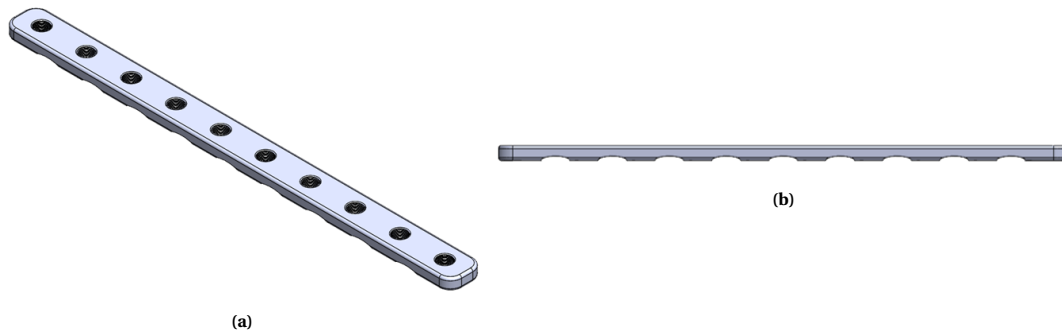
A locking internal fixation plate. a: isometric view, b: side view. The bottom of the plate has indentations to limit the contact pressure between bone and plate.
